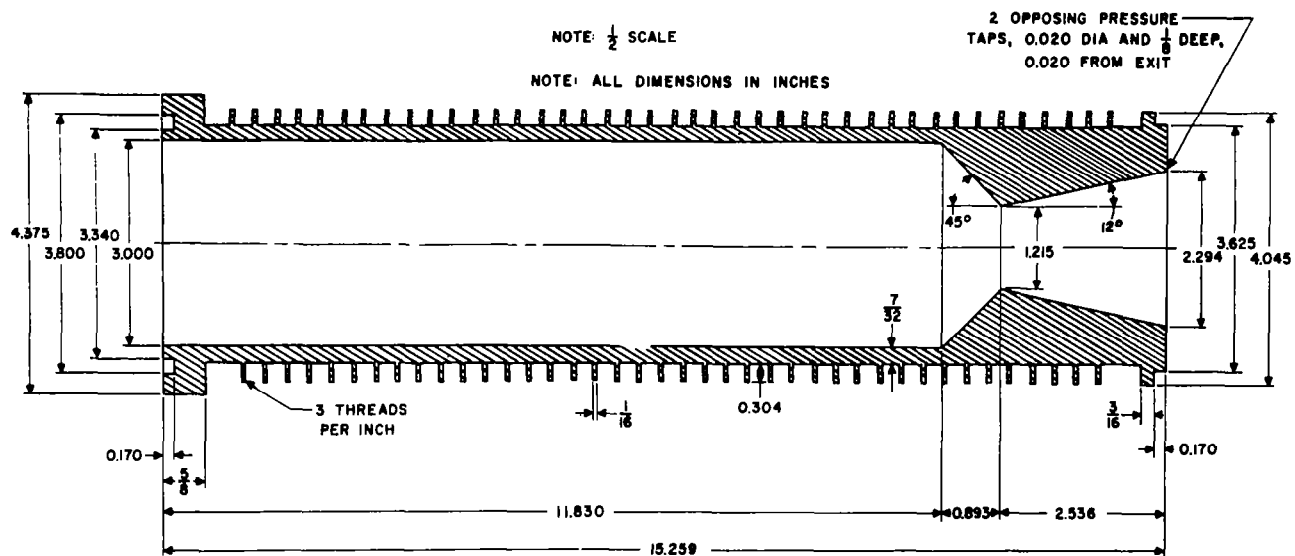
Combustion Chamber Insert, 500 - Pound Thrust Nozzle
